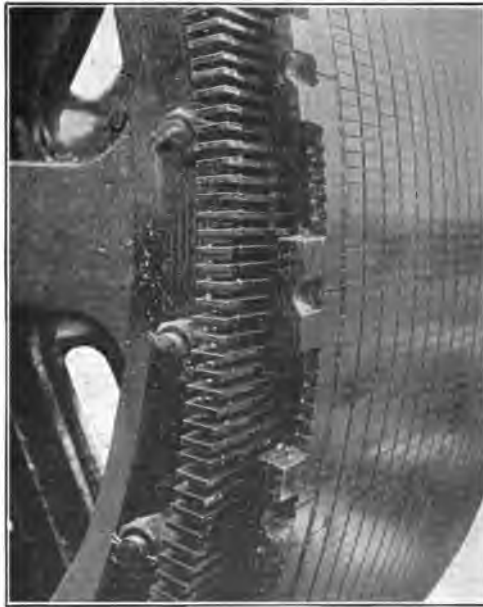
U. S. S. *New Mexico*: Close-up View of Motor Rotor
